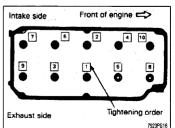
Cylinder head bolt torque sequence—1.8L engine
